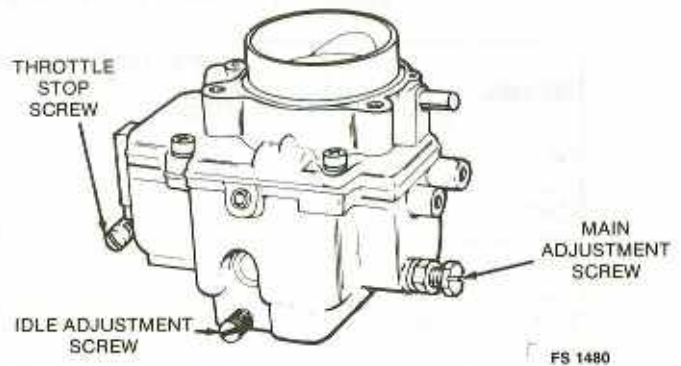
MIXTURE SCREW ADJUSTMENTS (BFA, BGA, NH)
